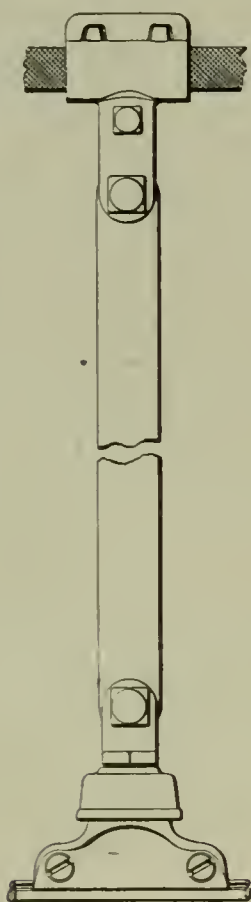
SPREADER MADE OF FLAT STEEL STRIP
